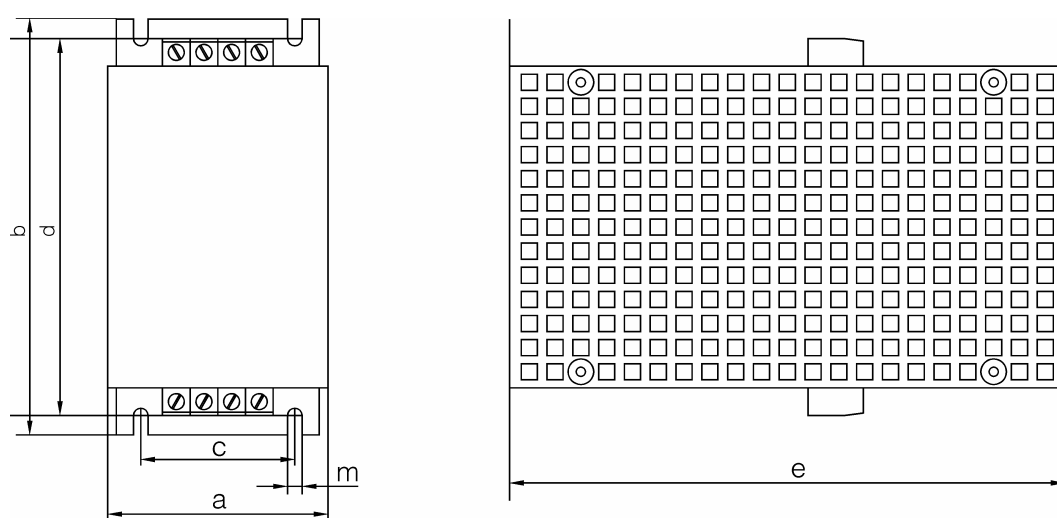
Dimension drawing, mains filter, frame size 1
